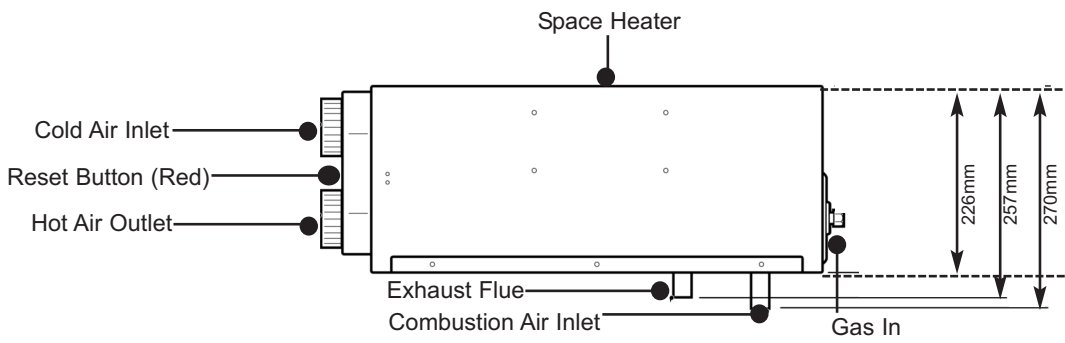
Internal Installation - Side View - SH2201 / SC2201
